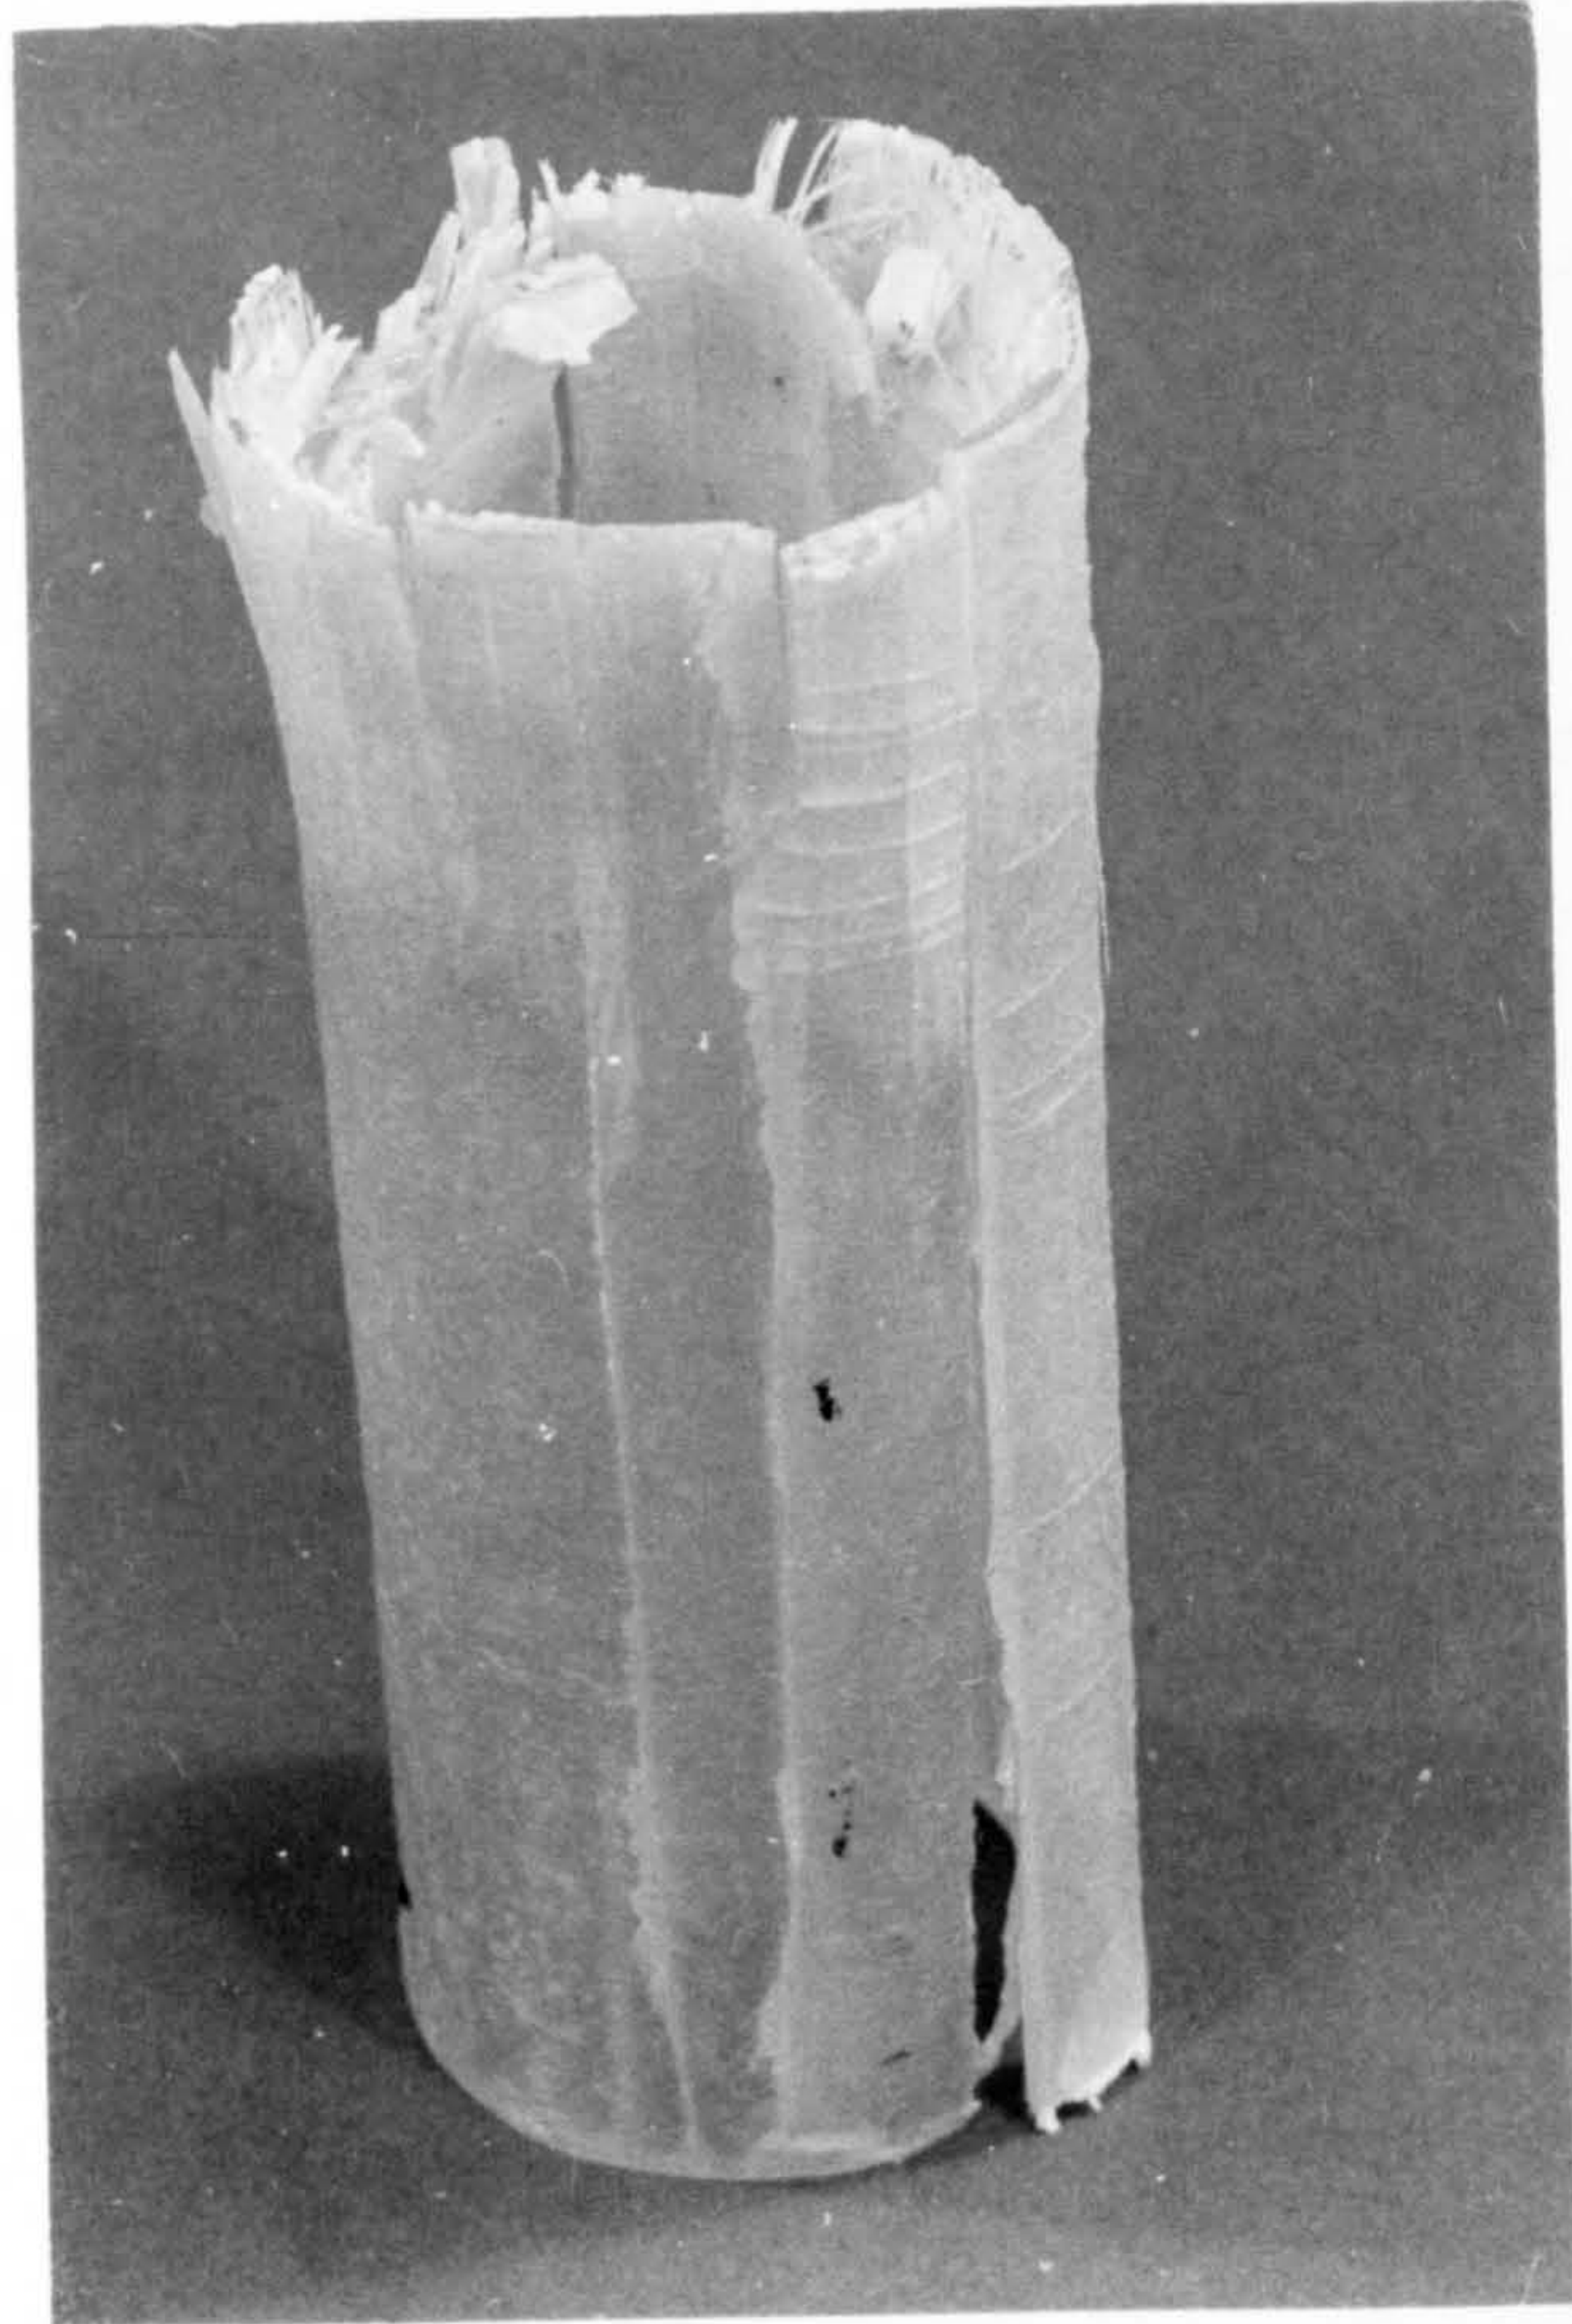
Axially wound tube crush mechanism. Note long axial cracks.
